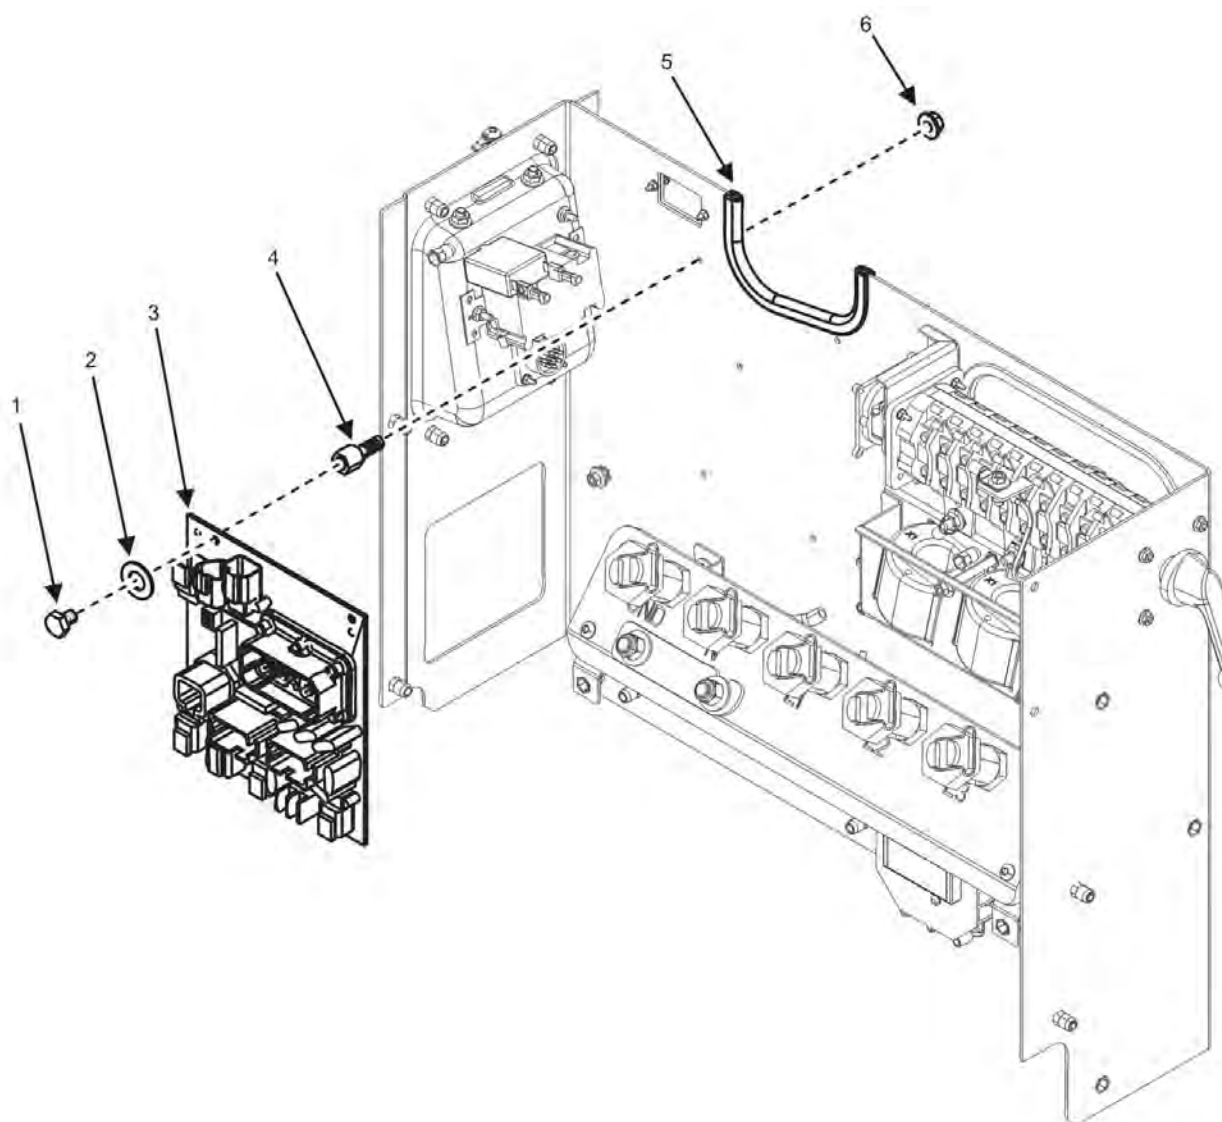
Printed Circuit Board Module (Sheet 1 of 3).
